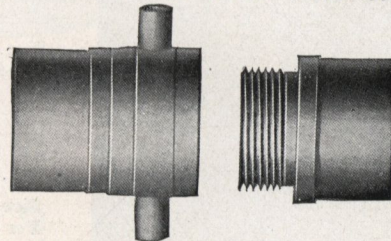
Soldered Couplings, for Oil, Air, Gas and Water
